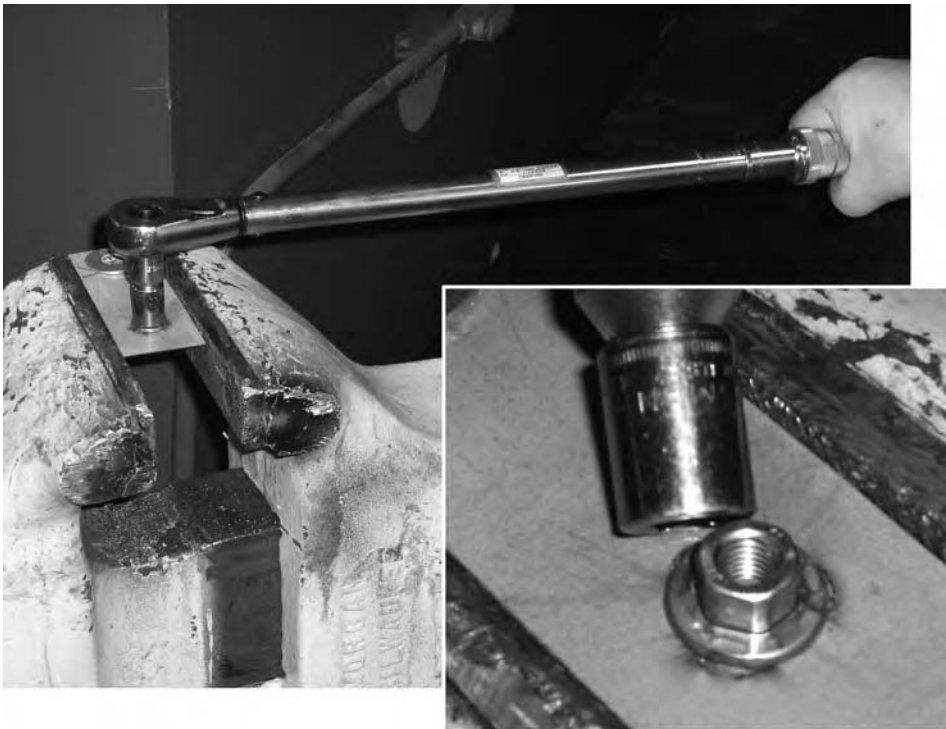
Example of torque test being performed. The weld is proof tested to a specific torque value. Courtesy of Edison Welding Institute
